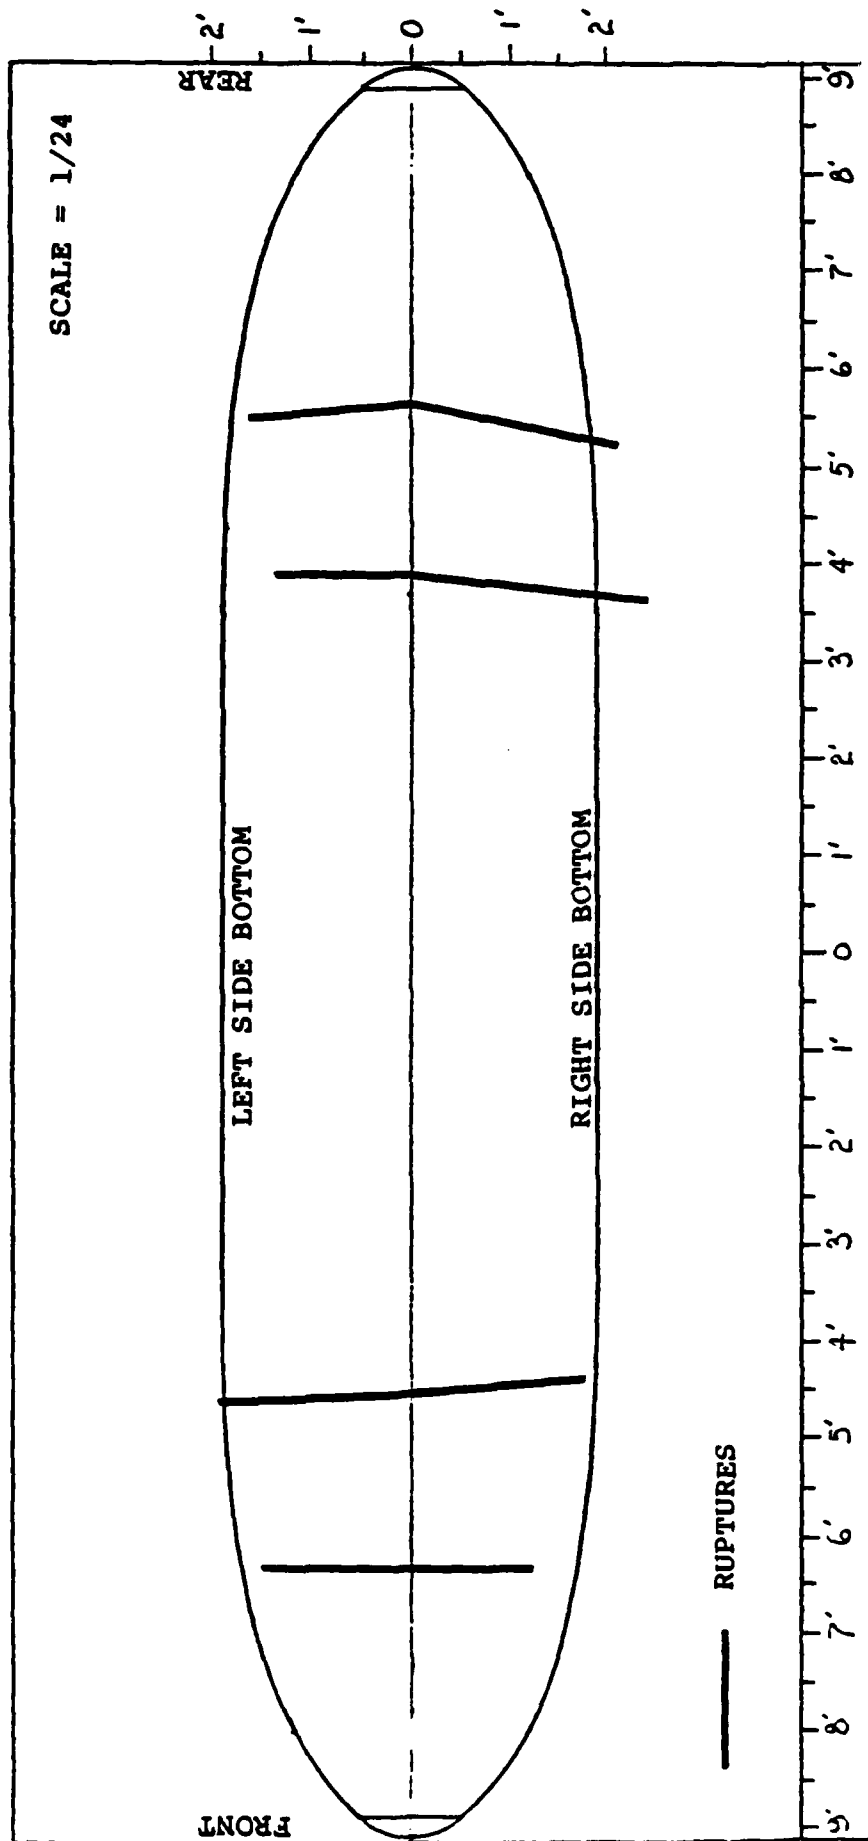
FUEL TANK SN0004 RUPTURE LOCATION SKETCH.
